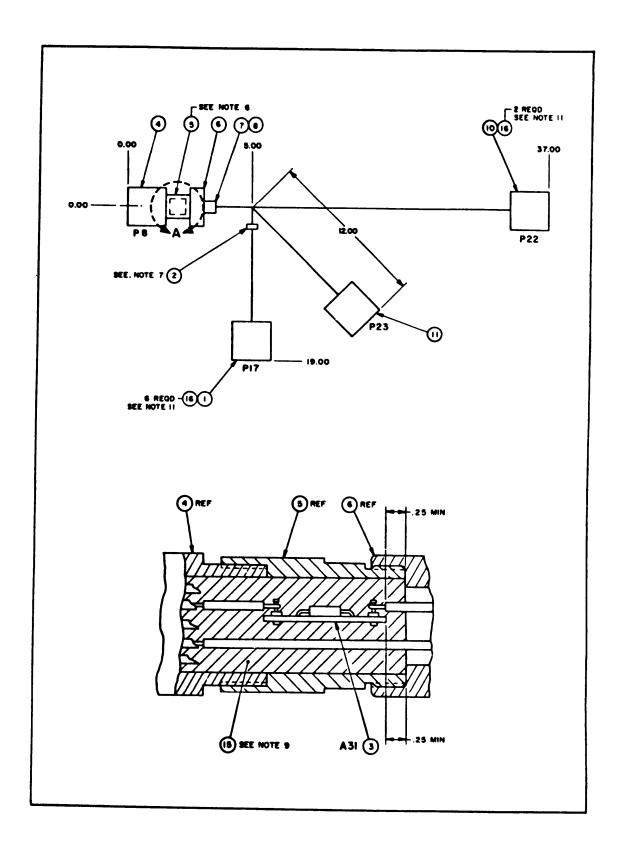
400 Hz Electric Governor System Wiring Harness Assembly Drawfing No. 84-704 (Sheet 1 of 2)
